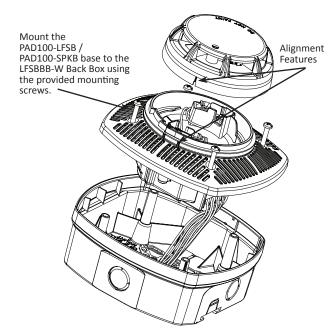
Assembly of Detector on LFSBBB-W Back Box
